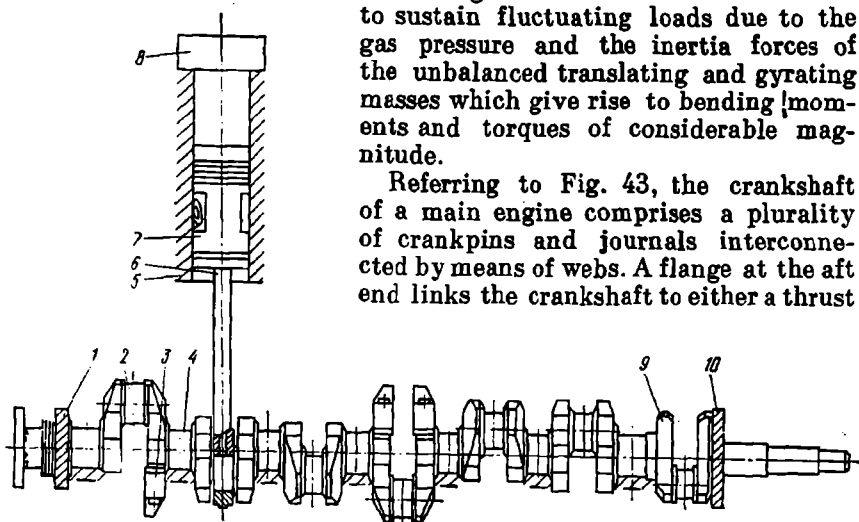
Crankshaft and its location with reference to engine cylinder and piston
